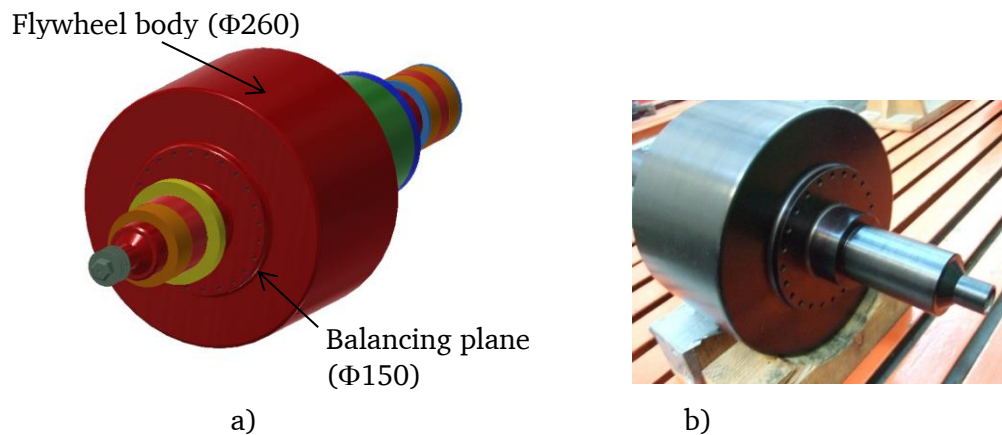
Rotor balancing screw holes on the additional plane with a diameter of 150 mm: a) 3D drawing [47], b) photo of the prototype
